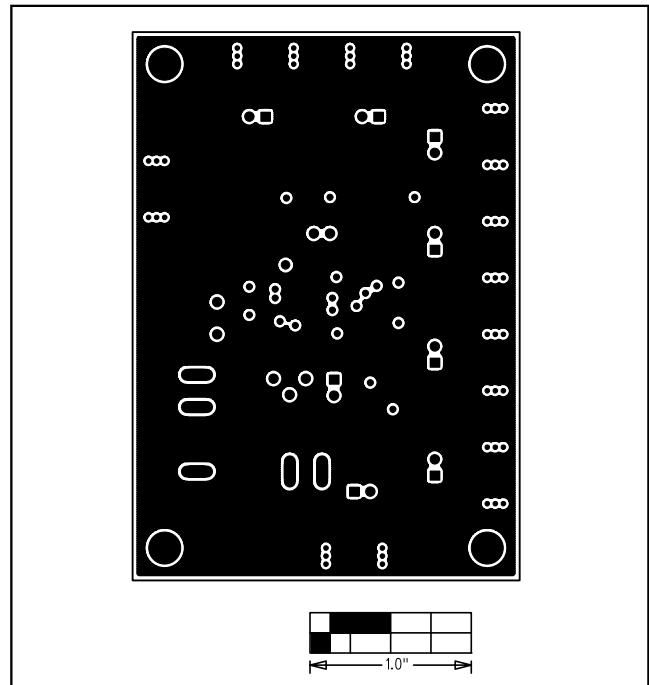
MAX9486 EV Kit PC Board Layout—Inner Layer 3 (DVDD Layer)
